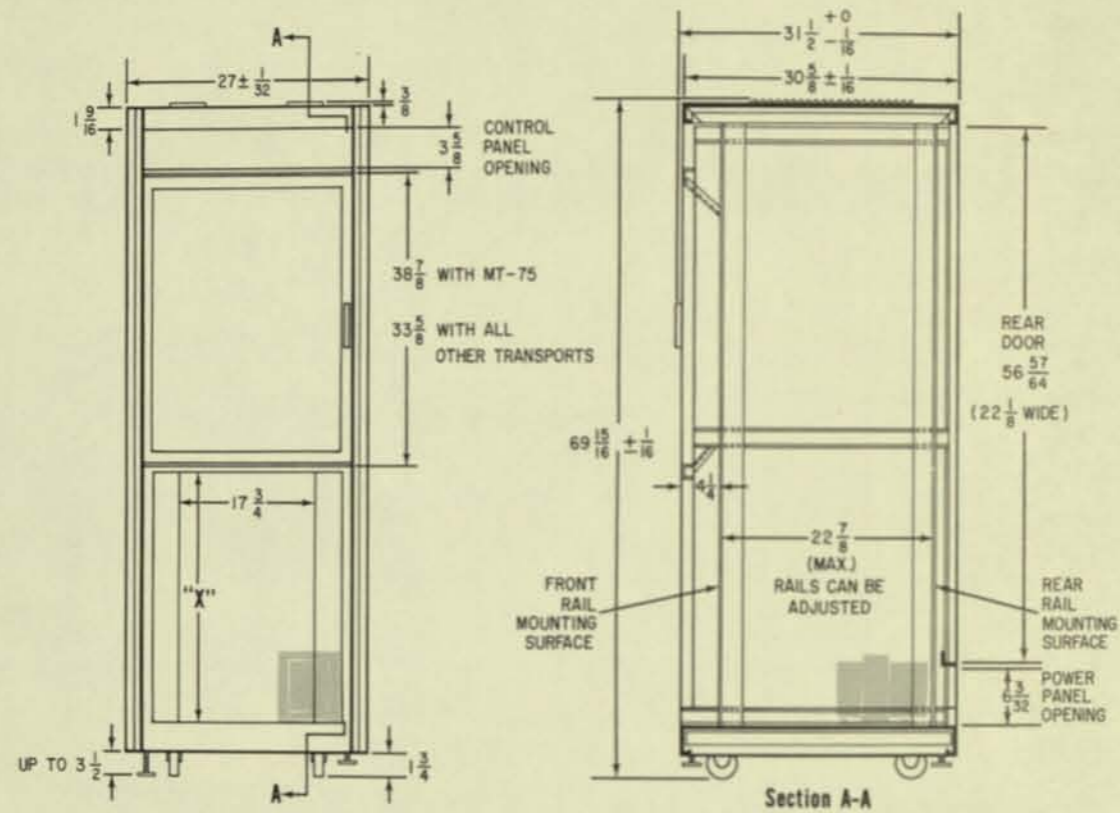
Dimensional Drawing, Potter CAB-250 Upright Cabinet
